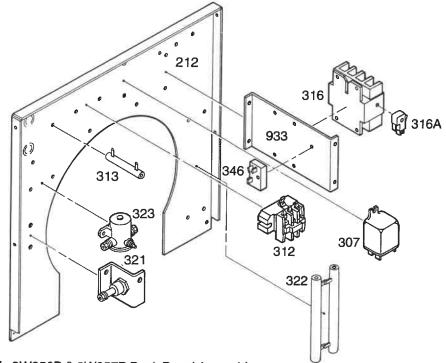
Models 3W056B & 3W057B Back Panel Assembly
